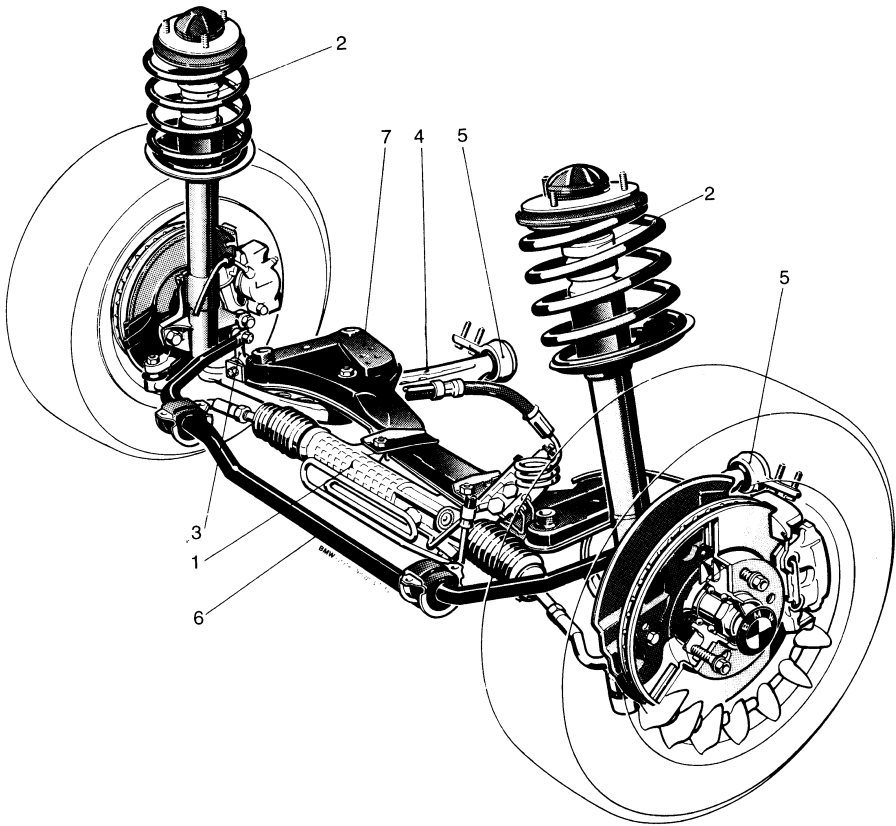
Spring strut front axle of the BMW Roadster Z3, which Lemförder Fahrwerktechnik produce in the USA and supply directly to the assembly line there. The additional springs 2 are positioned in the coil springs (Fig. 1.11) which are offset at an angle in order to reduce friction. The stabilizer 6 is connected to the lower links by the struts 3.
